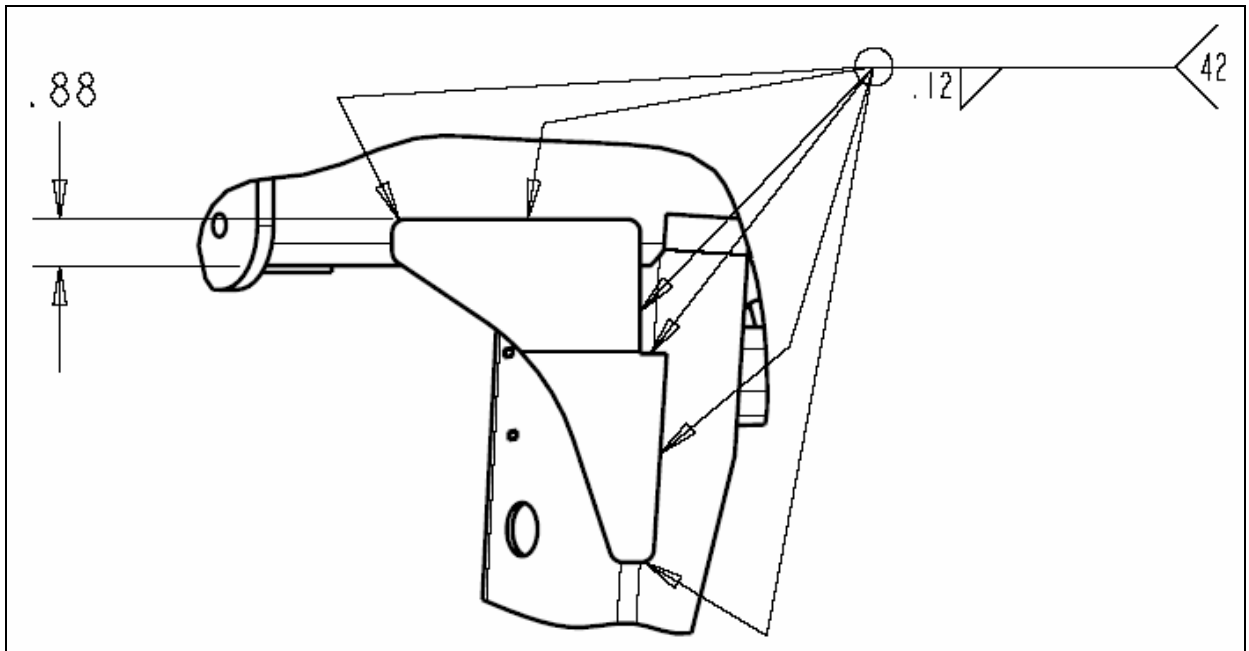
Weld gusset 10543-22 to the bottom of the driver side trailing arm and lower housing
